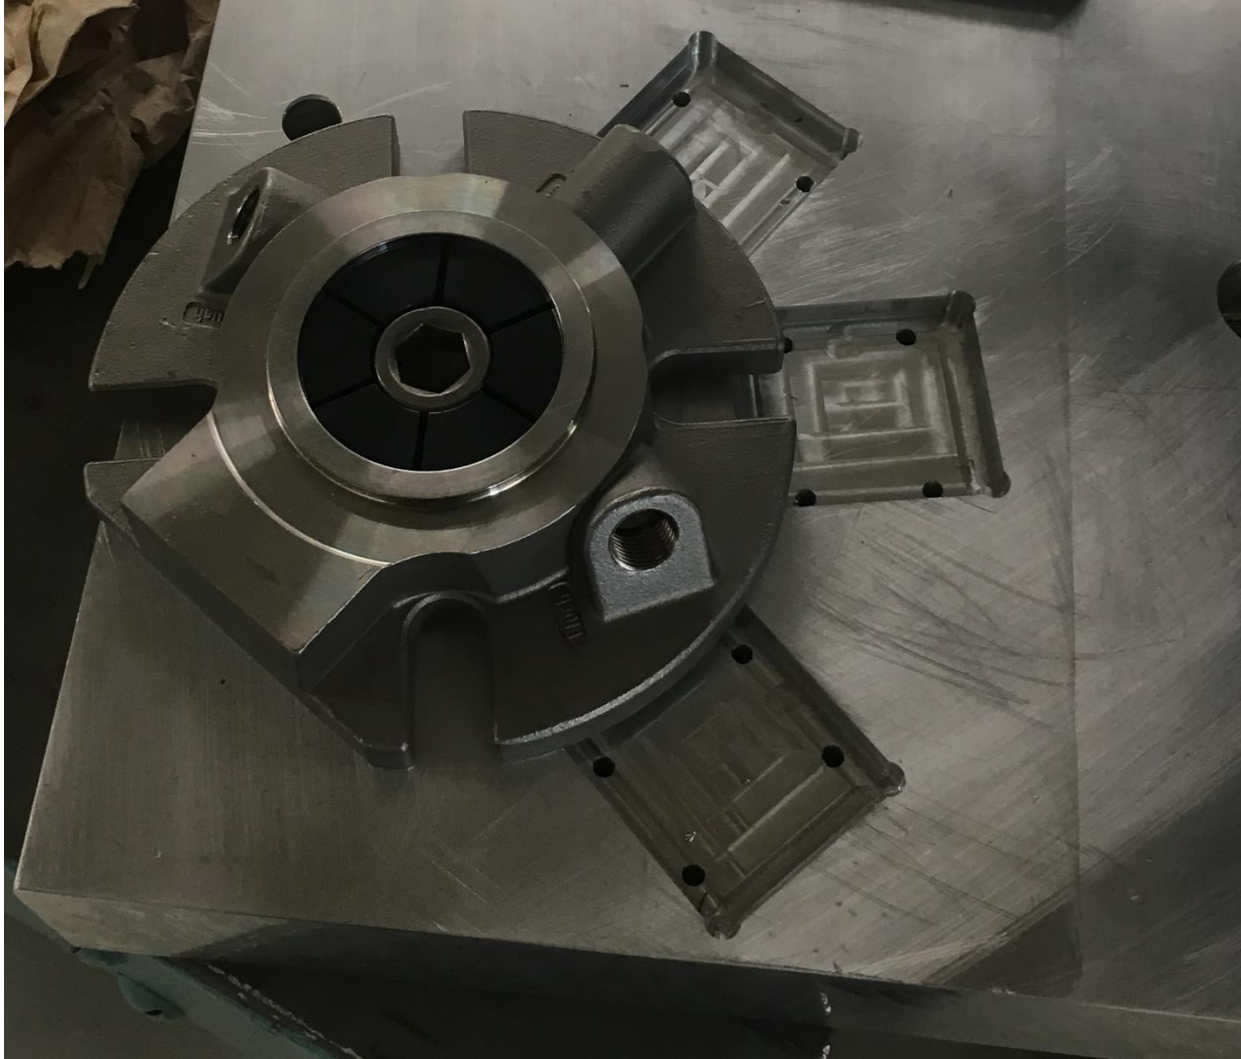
Single seal and collet assembled top view with orientation for flush port drilling and tapping.
